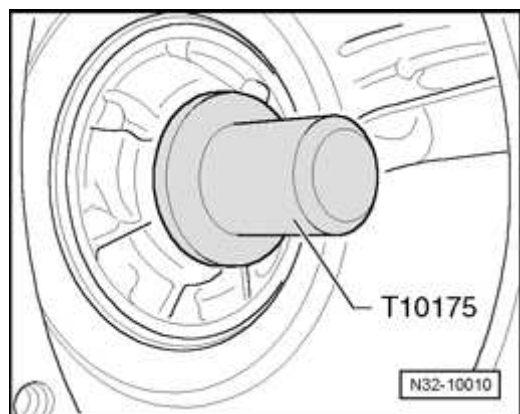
Driving In Seal Flush Using Thrust Piece T10175
